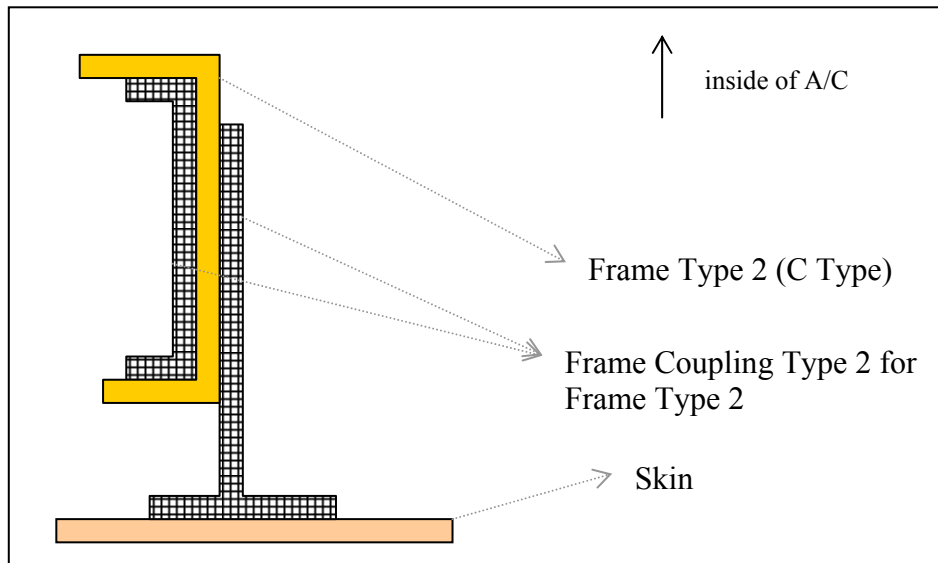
“C” Type of Frame and Frame Couplings to be used in the Design
